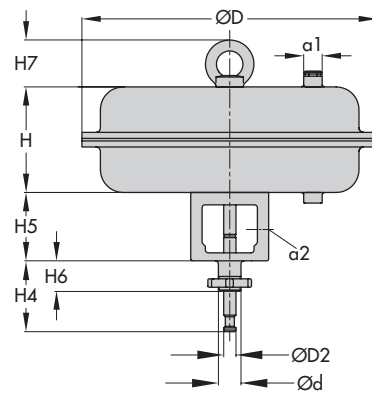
· Type 3277 (700 cm² version with lifting ring)
